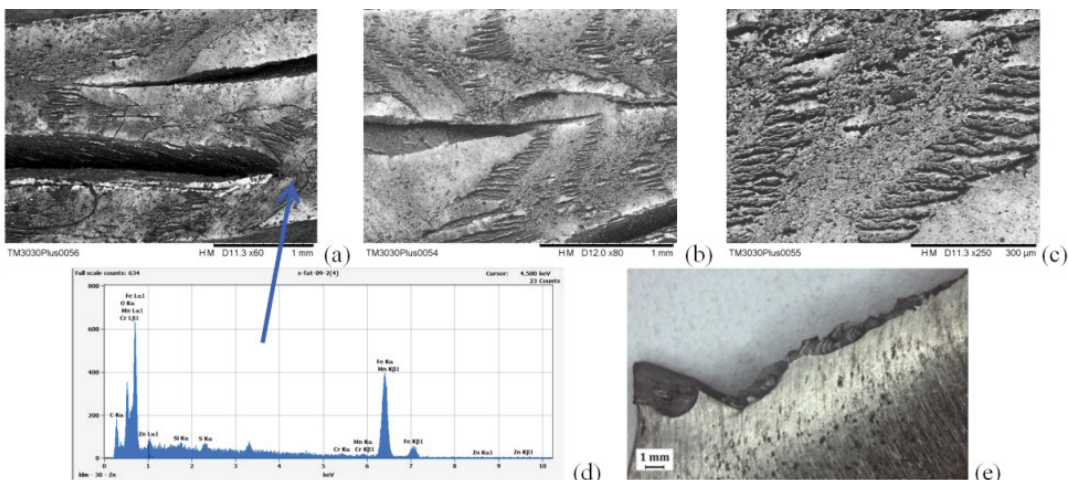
Static tensile test of a welded specimen fracture surface: (a), (b) and (c) SEM fracture surface; (e) through thickness fracture surface.
